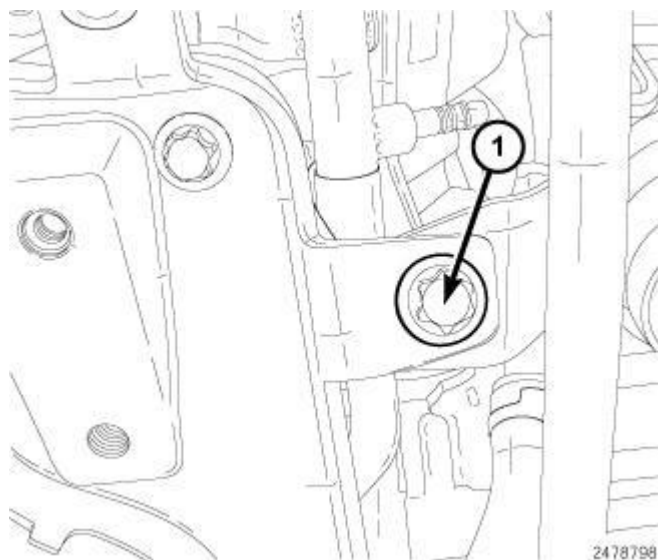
Vacuum Supply Line At EGR Solenoid
